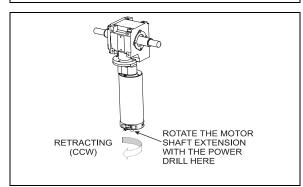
SLIDE-OUT MOTOR ROTATION
